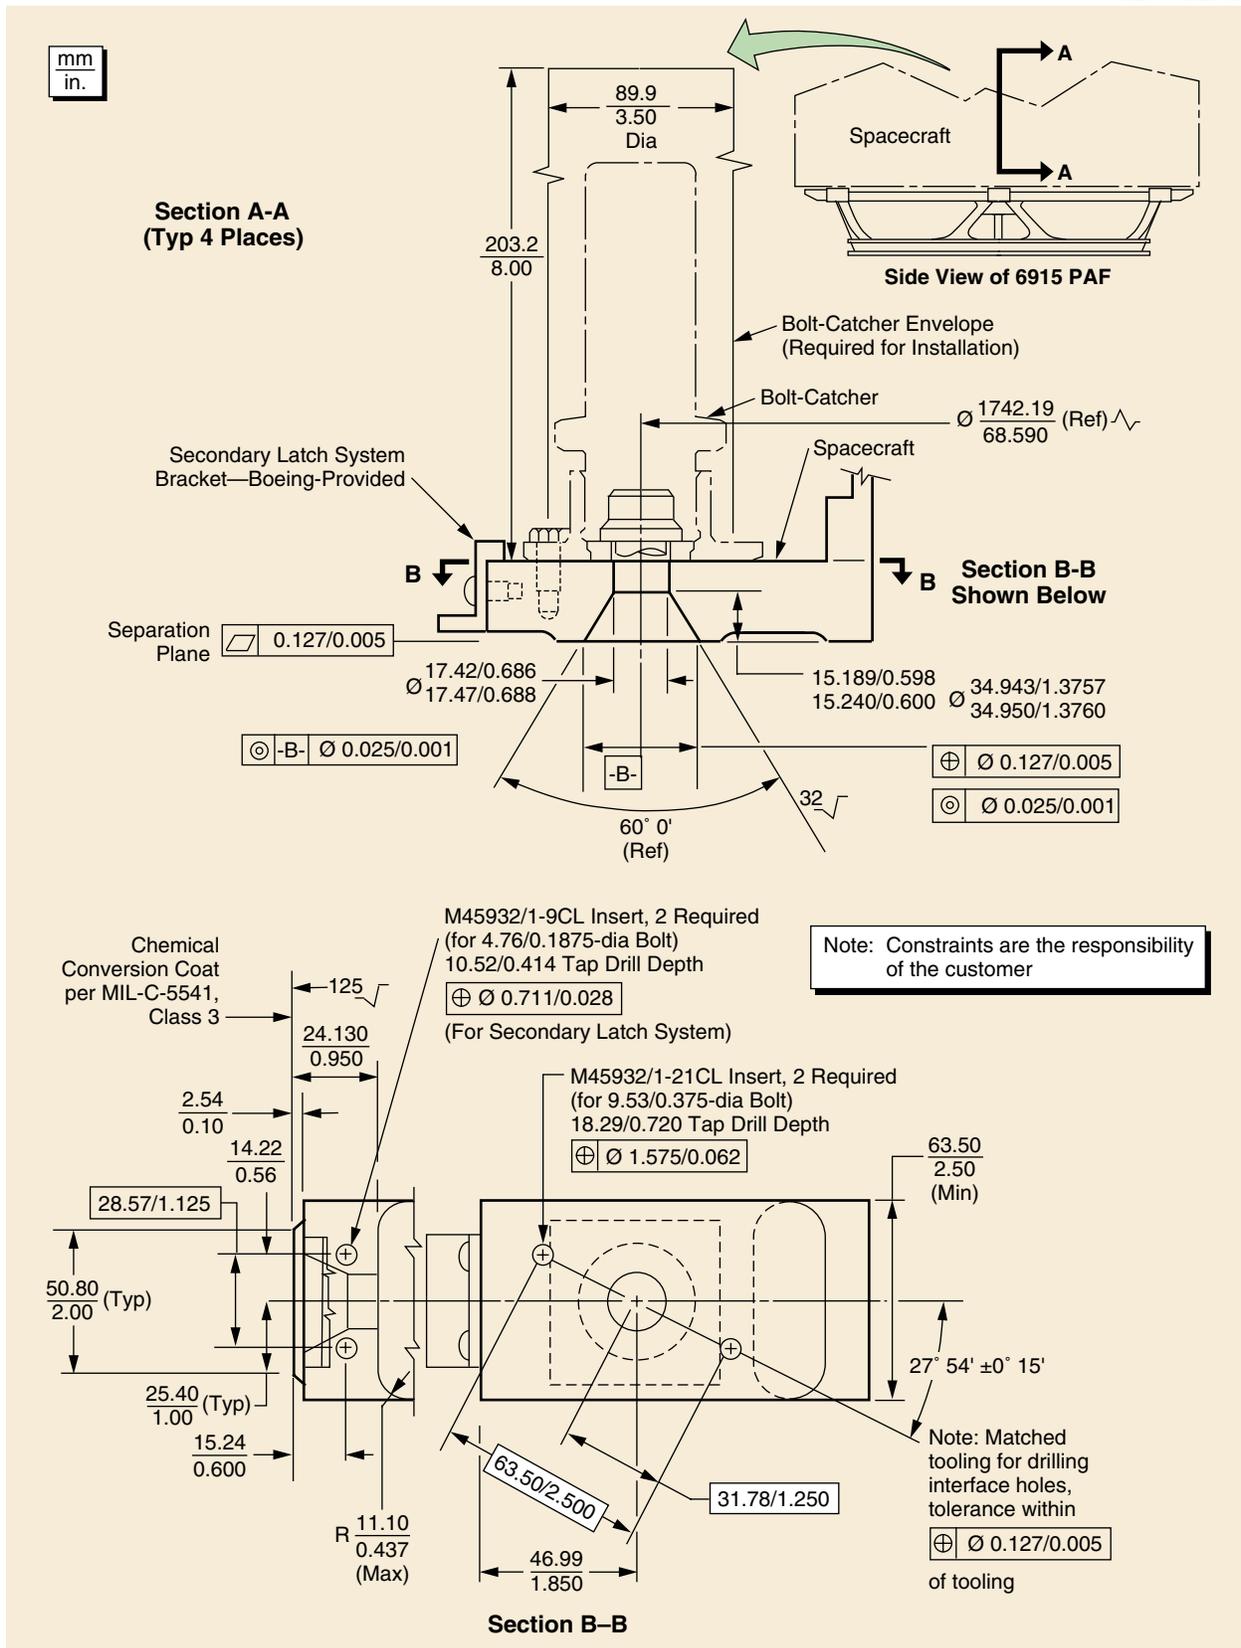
Dimensional Constraints on Spacecraft Interface to 6915 PAF
